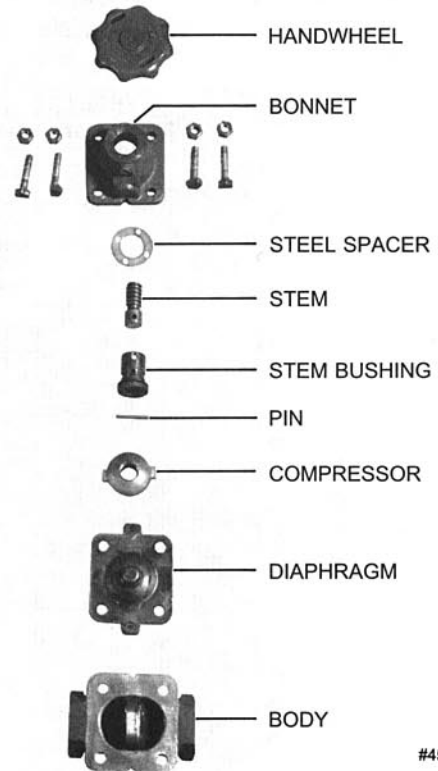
EXPLODED VIEW OF DIAPHRAGM TYPE VALVE
